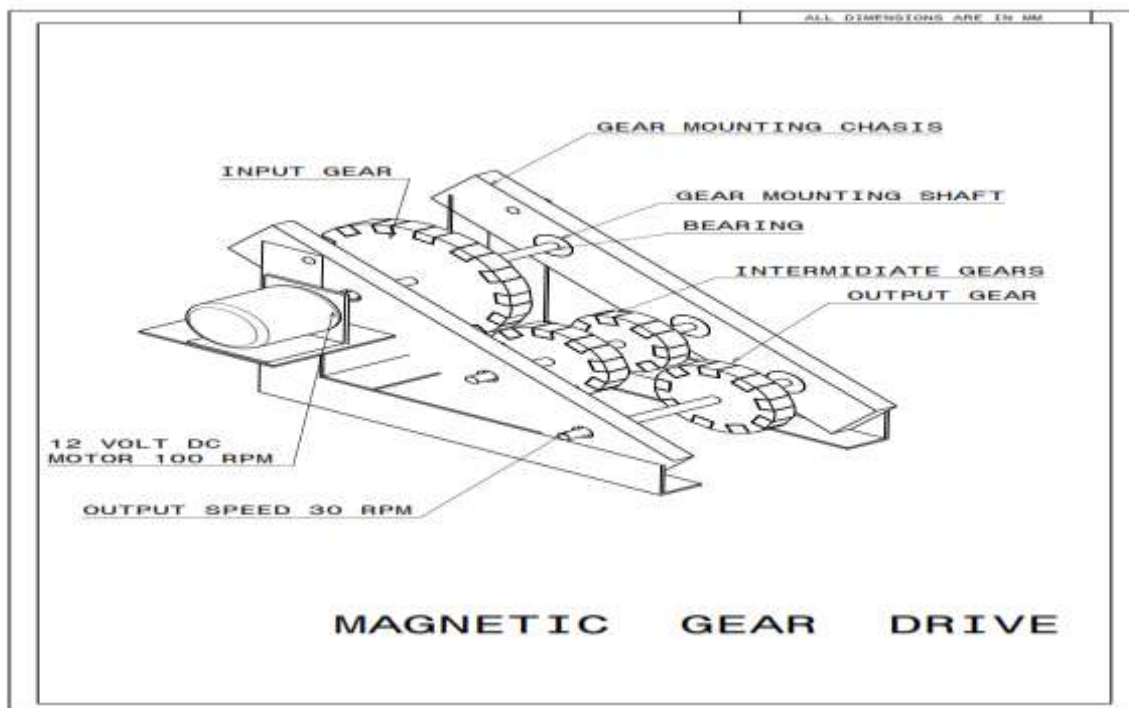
Design And Fabrication Of Contactless Magnetic Gears System
